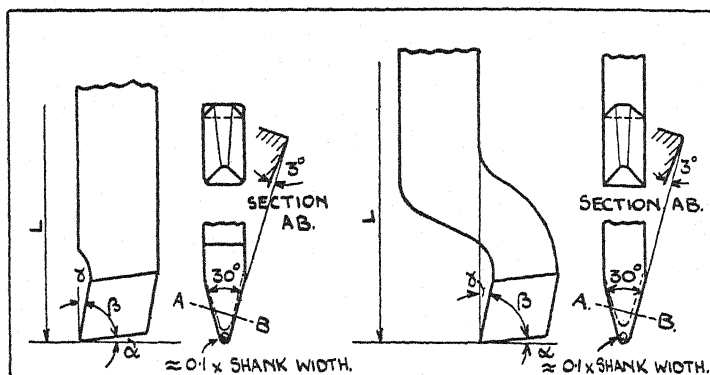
POINTED SMOOTHING TOOLS, STRAIGHT AND BENT TYPES.
